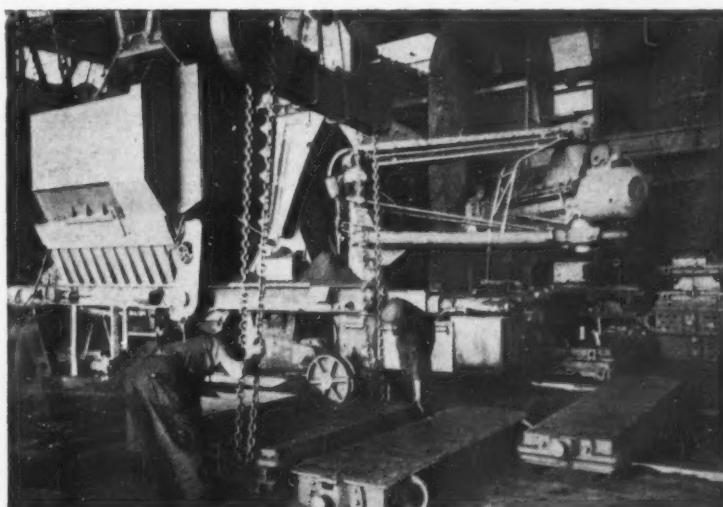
A Large American-built Sand Slinger in Operation at the TOS-Kurim Machine Tool Works
